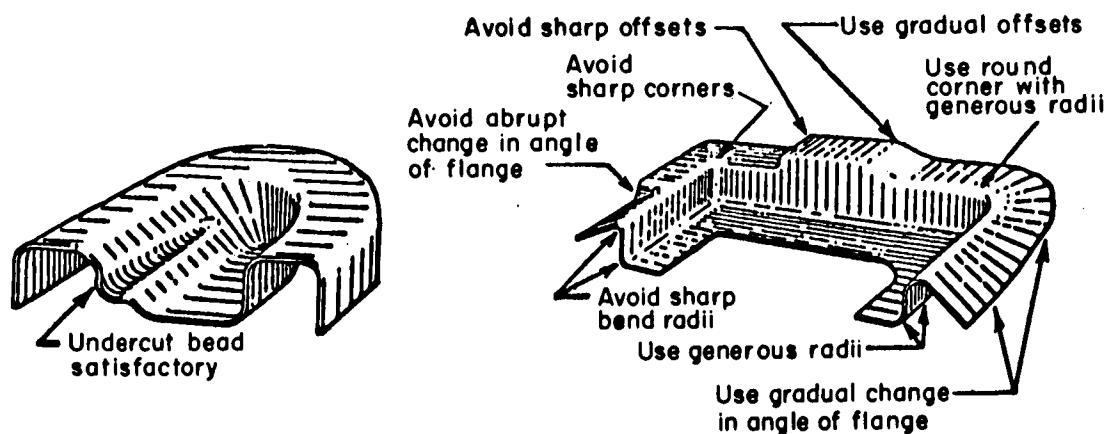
TYPICAL DROP-HAMMER FORMED PARTS
